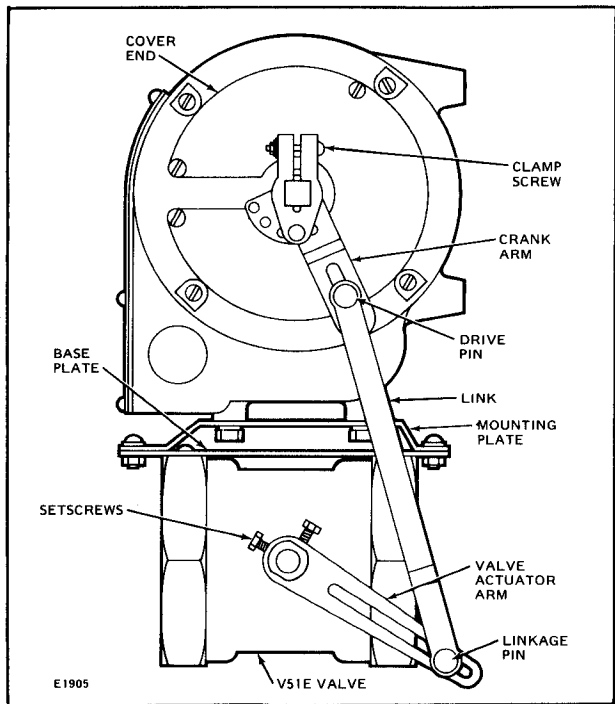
Q100C LINKAGE ASSEMBLY (V51E).
